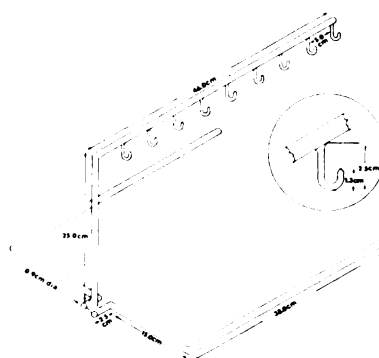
Isometric drawing of rack to scale, with dimensions.
